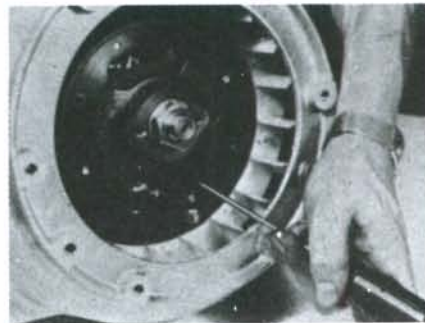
Breaker cam must be held in advanced position when checking timing.
